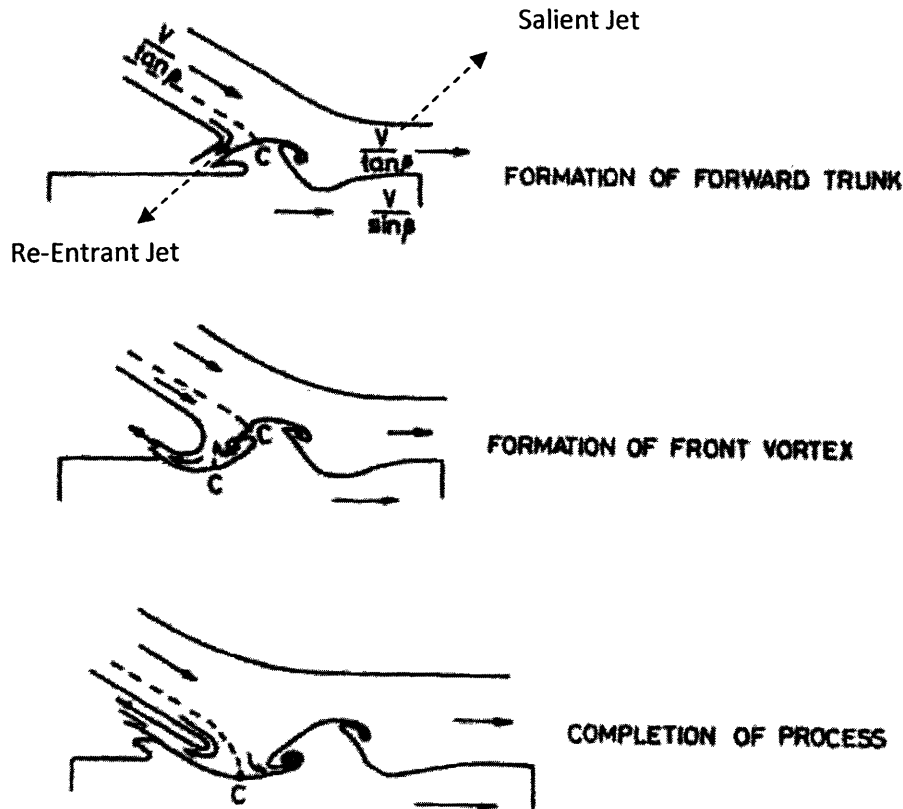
Diagram of the jet indentation mechanism causing the waveform that is observed at Explosive Welding and EMW material interfaces [22].
